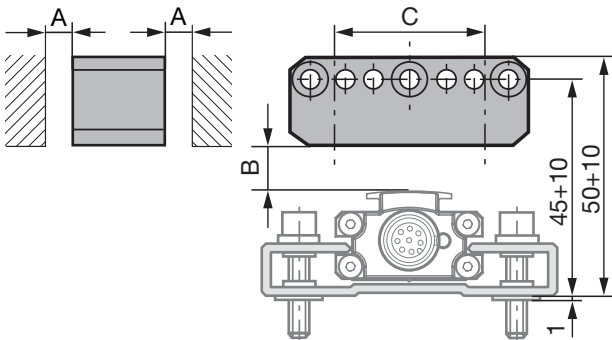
Dimensions and distances with BTL5-P-5500-2 magnet
